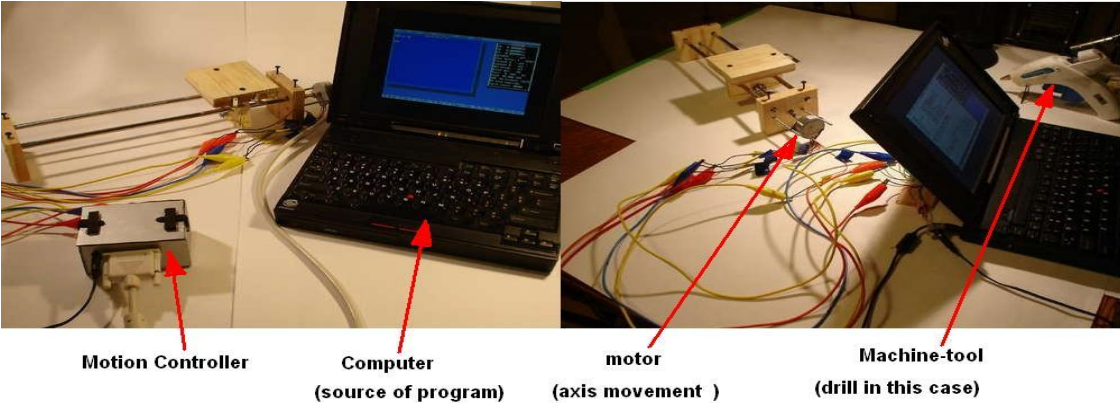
(a) A carpenter’s CNC machine with only the basic components.
